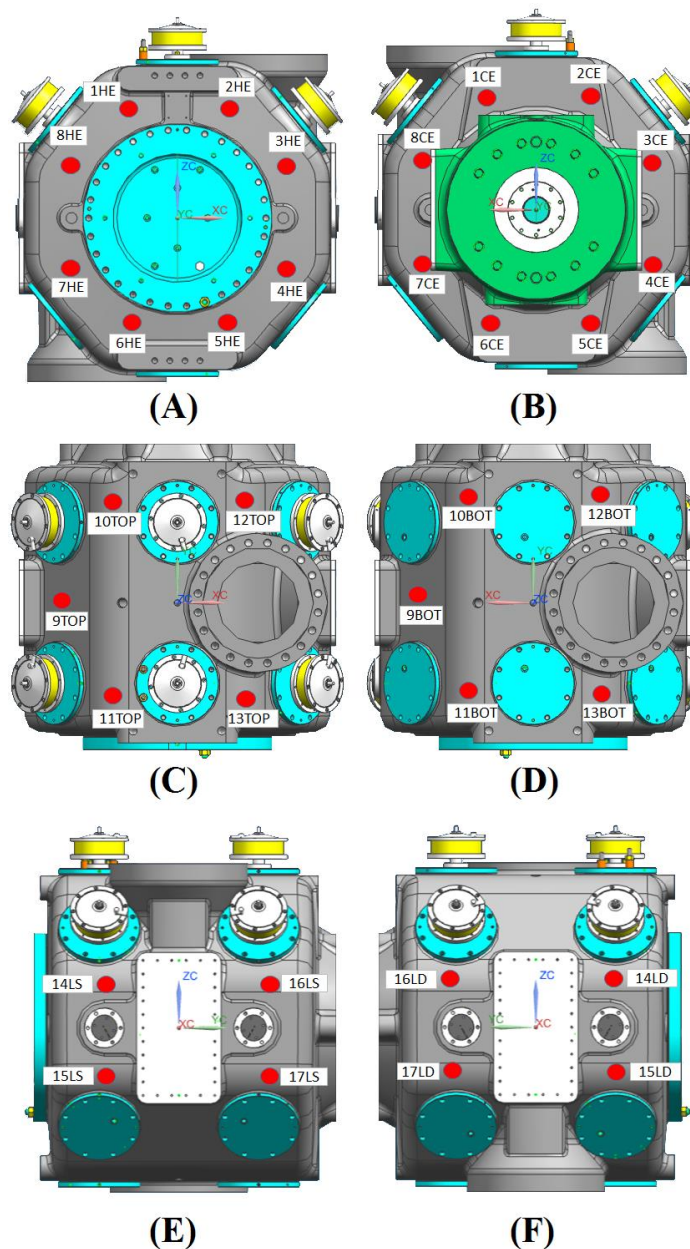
Measuring locations on the cylinder surface: (A) Head-End view, (B) Crank-End view, (C) Top view, (D) Bottom view, (E) Lateral-Suction view, (F) Lateral-Discharge view
